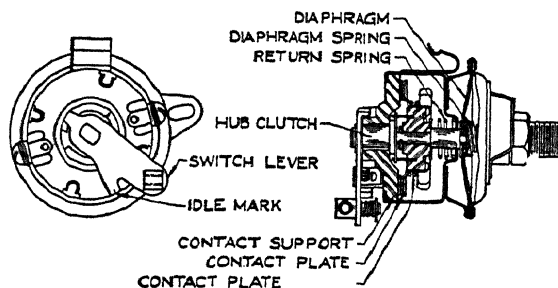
MANIFOLD MOUNTED VACUUM SWITCH
